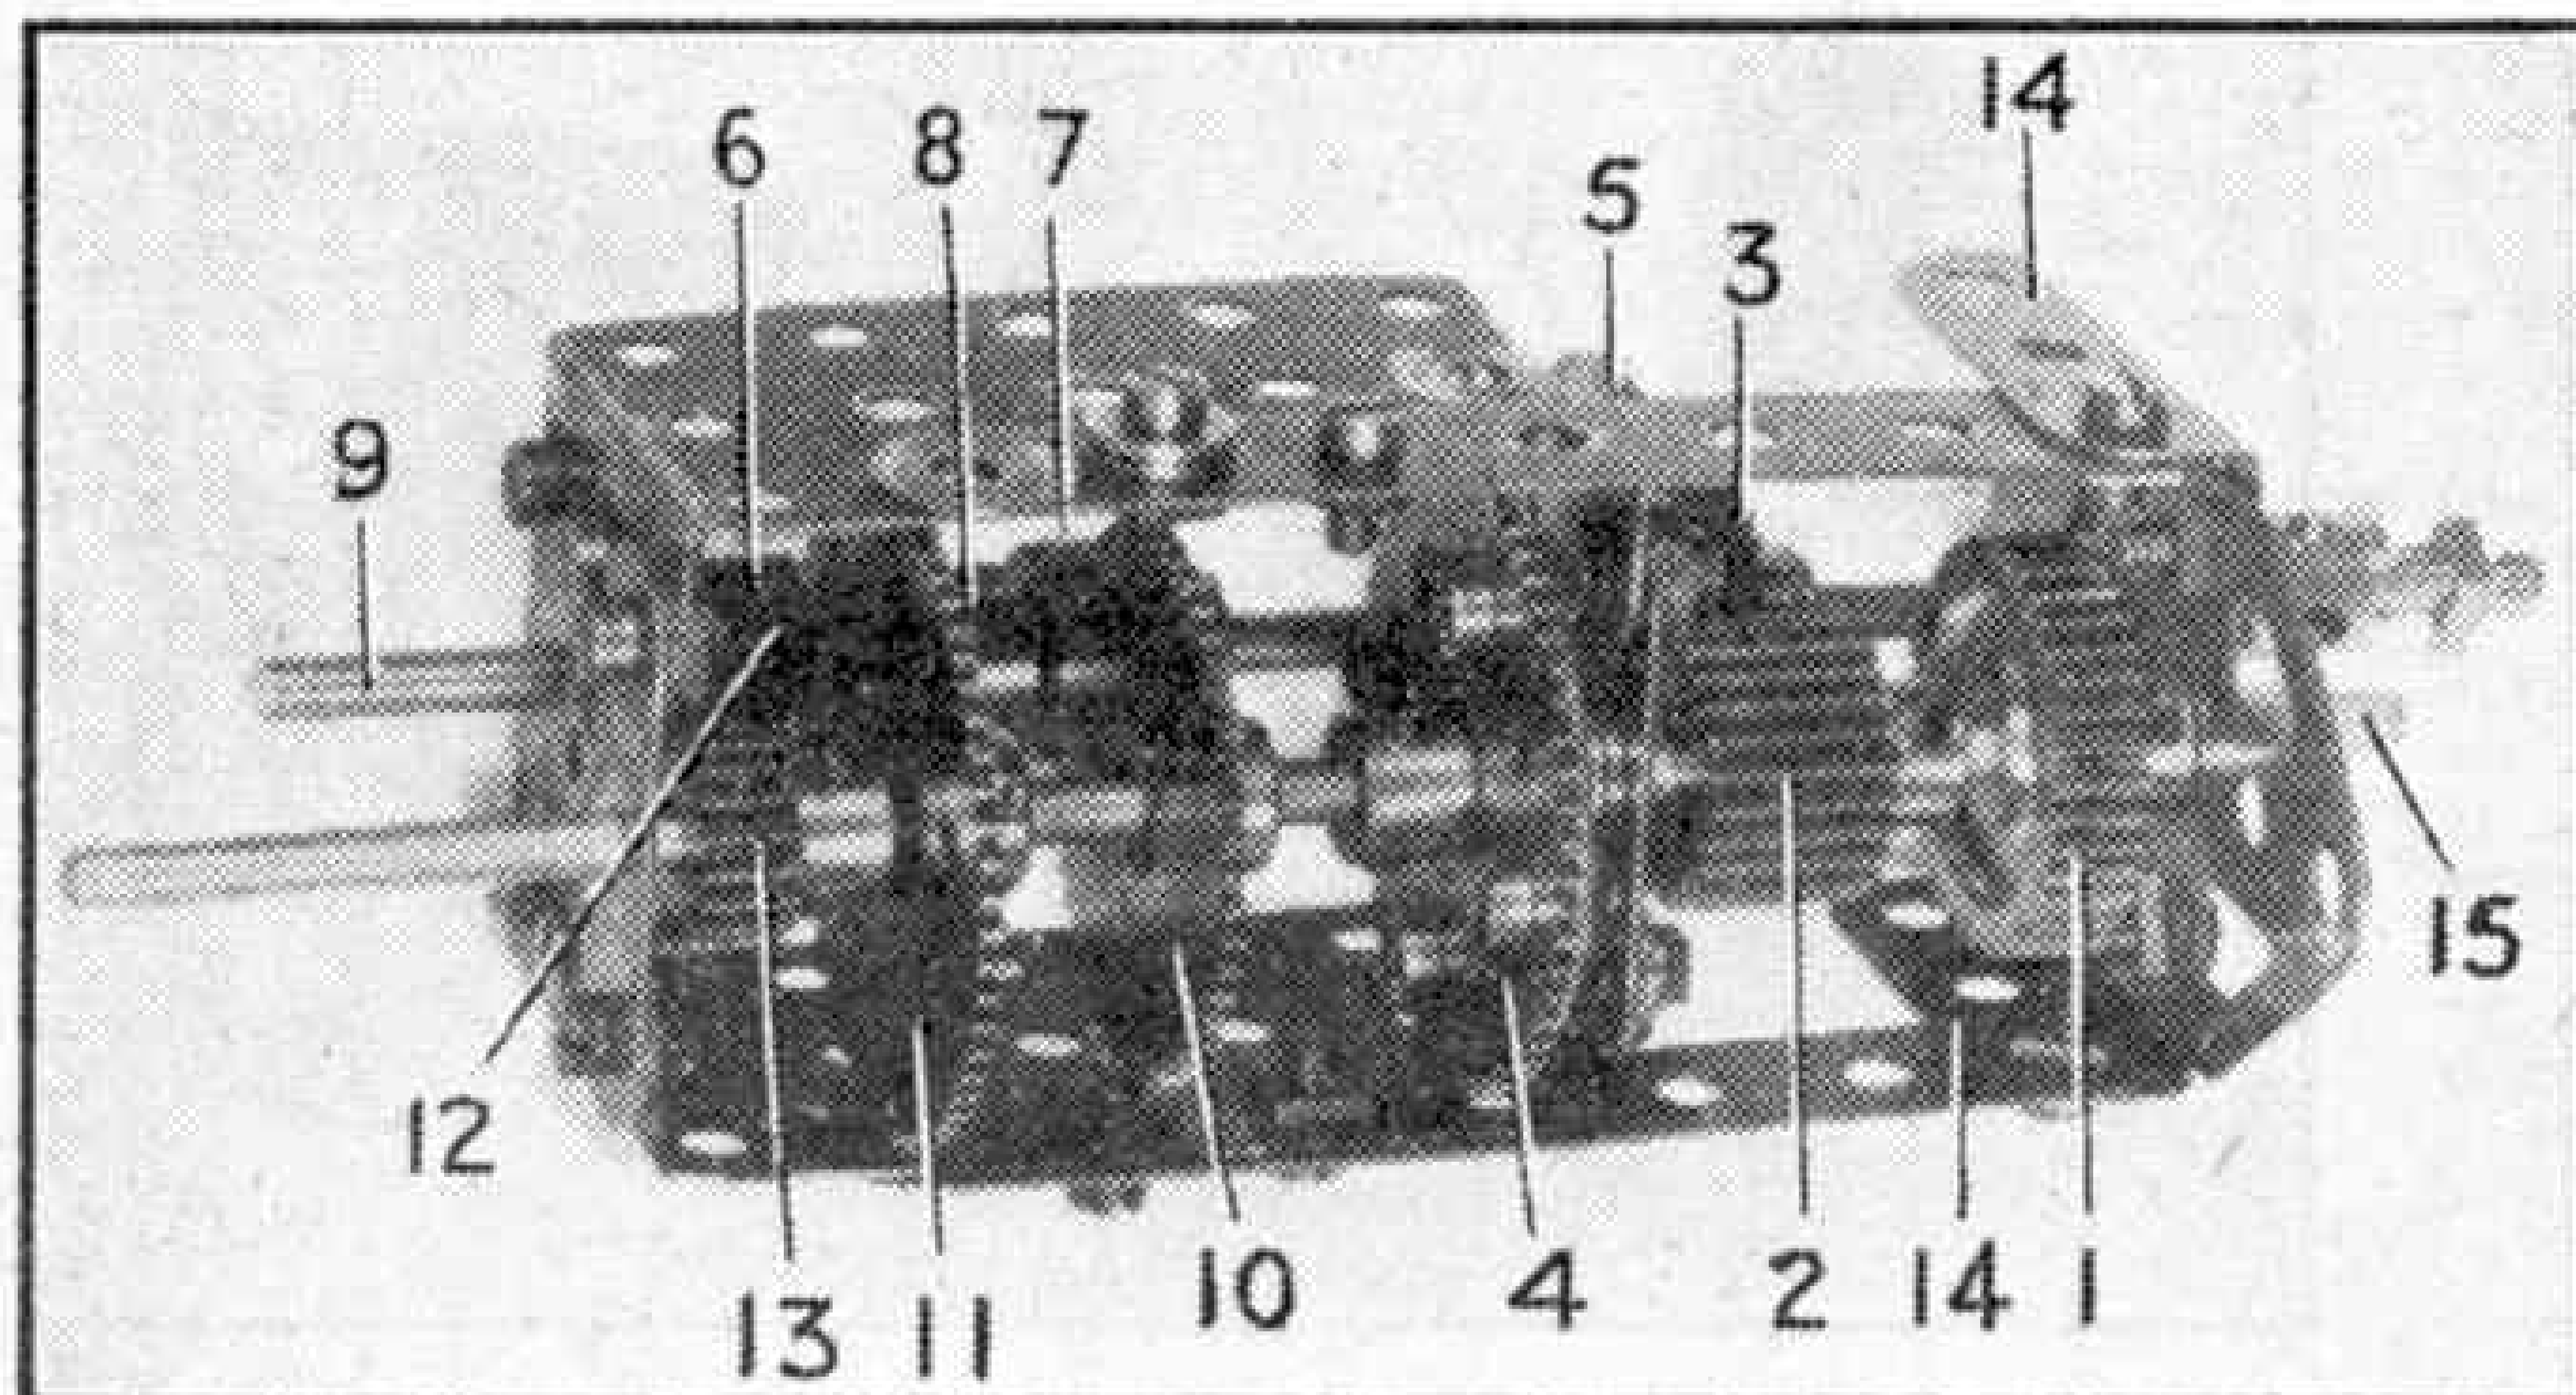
A four-speed and reverse gear-box built by Roland Brown, Oakham.
